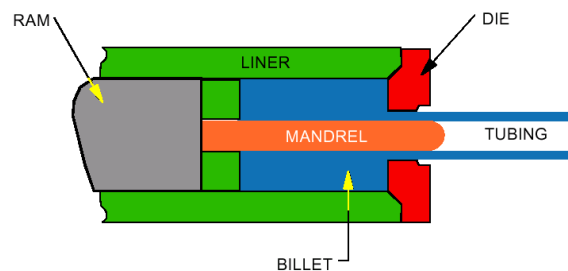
Illustration of the mandrel in the extrusion technique.
